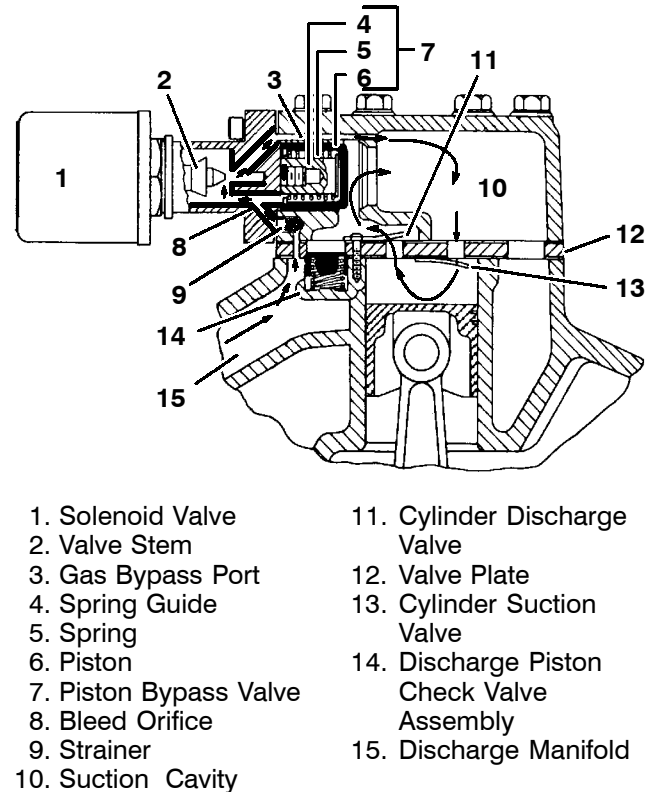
Compressor Cylinder Head Unloaded – Hot Gas Bypass
